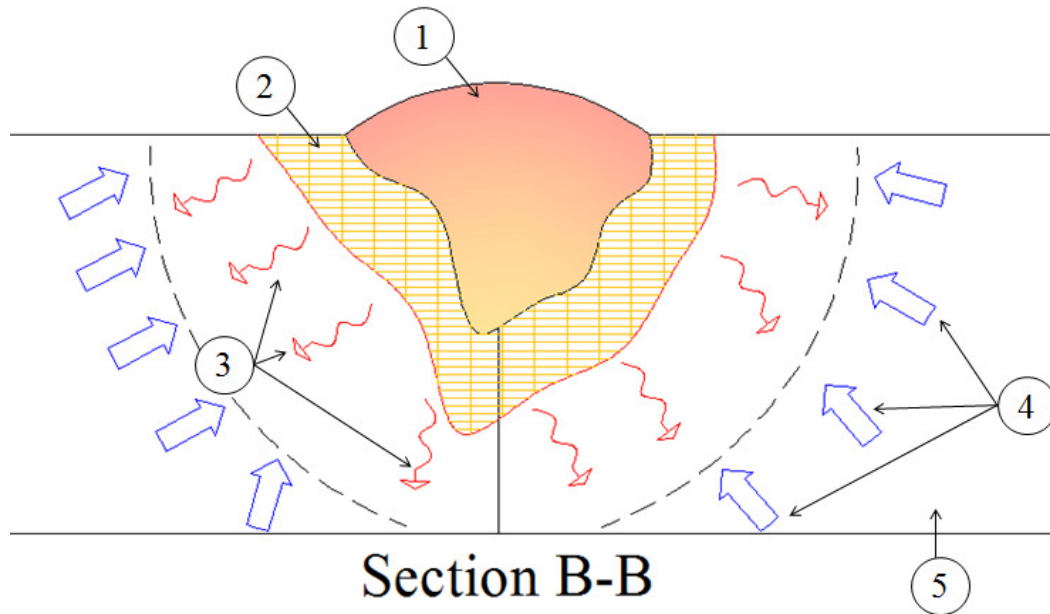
Section B-B: Heating up during the welding.
